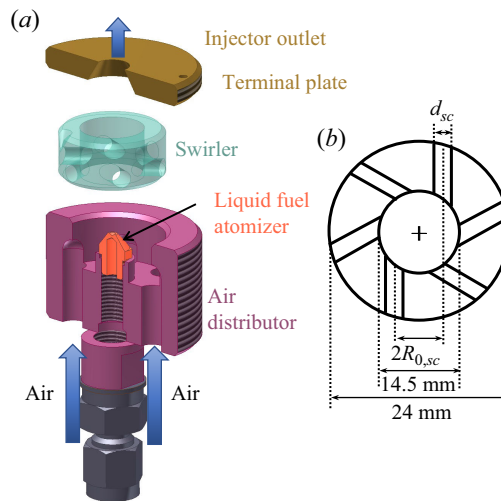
Exploded view of an injection unit, showing its main components (a). A top view of the swirler appears in (b).
